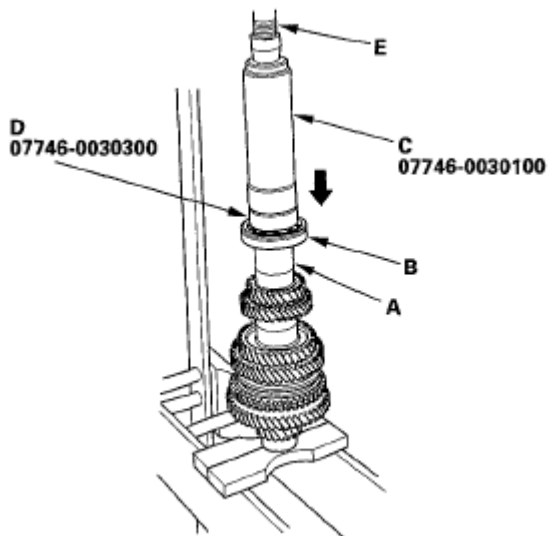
Installing Distance Collar, Shim, Old Ball Bearing And Driver Handle
